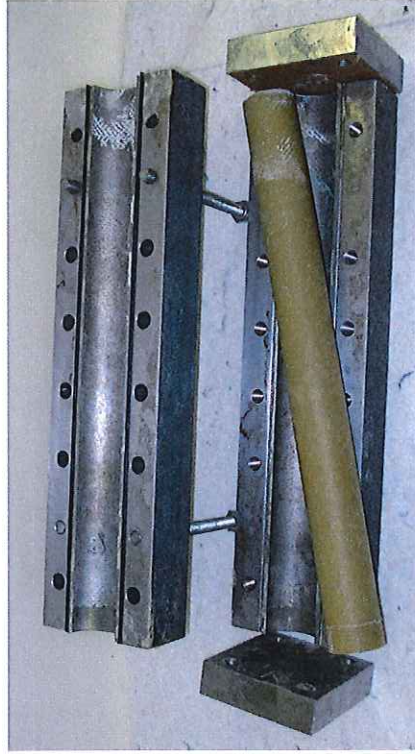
The steel mal in which the PC[®] Leakinject UNI 6816/E is cured under pressure consists out of 4 pieces.
